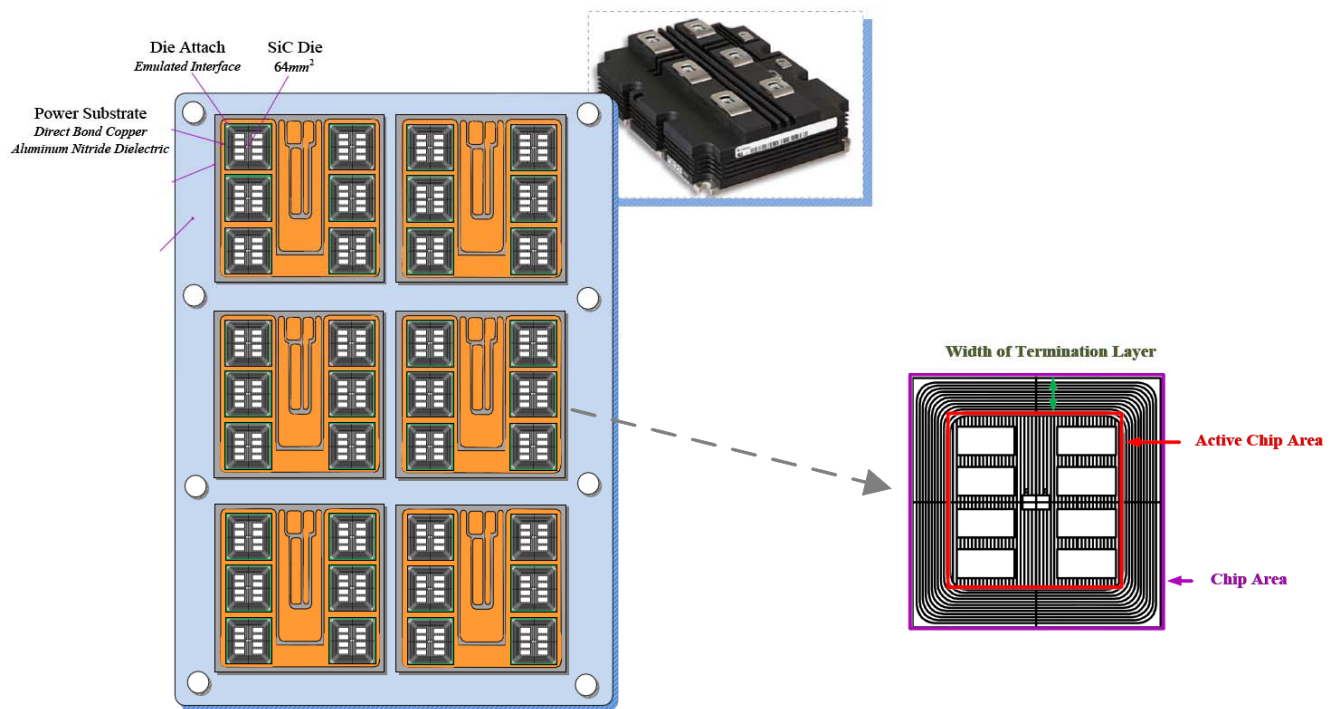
A Cutaway Drawing of SiC375R12500 (375 A, 12.5 kV) MOSFET Module
